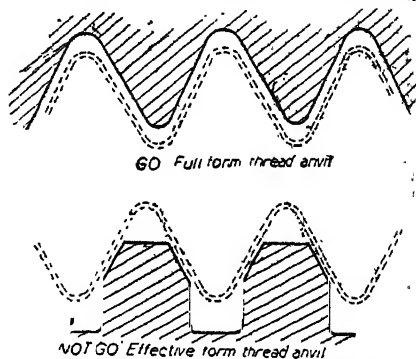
Thread profile of Wickman-type gauge anvils. The dotted line shows the standard work-thread form and gauge zone of contact.
